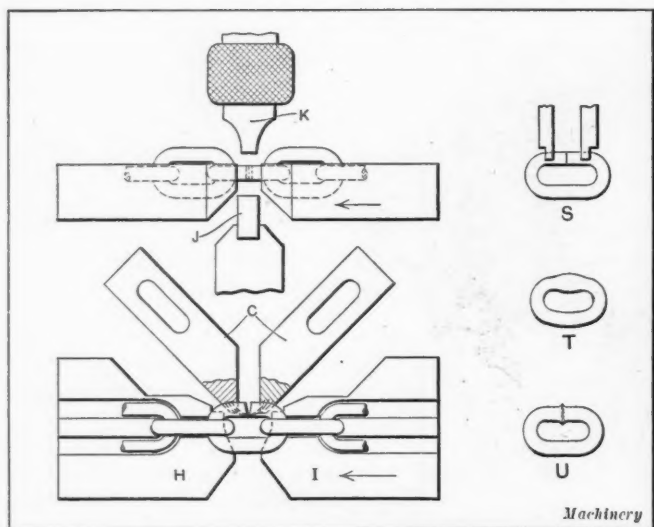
Diagram showing Operation of Chain-welding Clamping Dies and Electrodes; also Results of Finished Work—Thomson Electric Welding Co.
